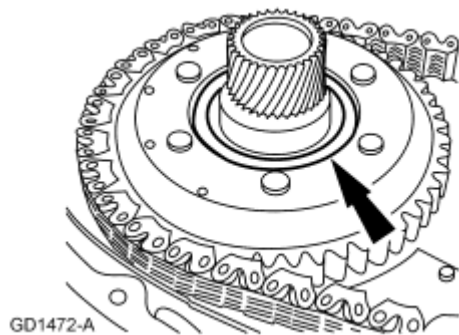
No. 13 Driven Sprocket Thrust Bearing
